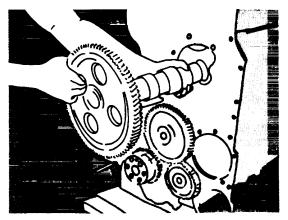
N-21. Install the Camshaft 4. Align the "X" marks on the camshaft and idler gear to make sure the timing is correct. See Figure 16N-19.
